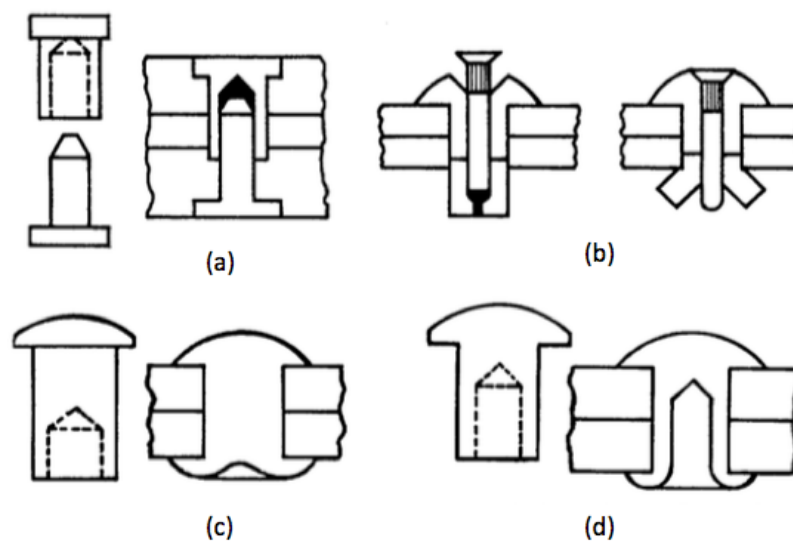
Different type of rivet joints (a) Compression tubular rivet (b) Drive-pin rivet (c) Semi-tubular rivet (d) Full-tubular rivet [25]
